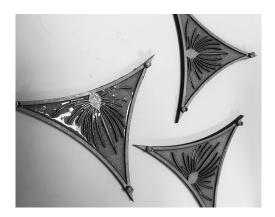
1/8" Acrylic mold with bolt and screw for disassembly Fig 15: Silicone casting inside the mold
